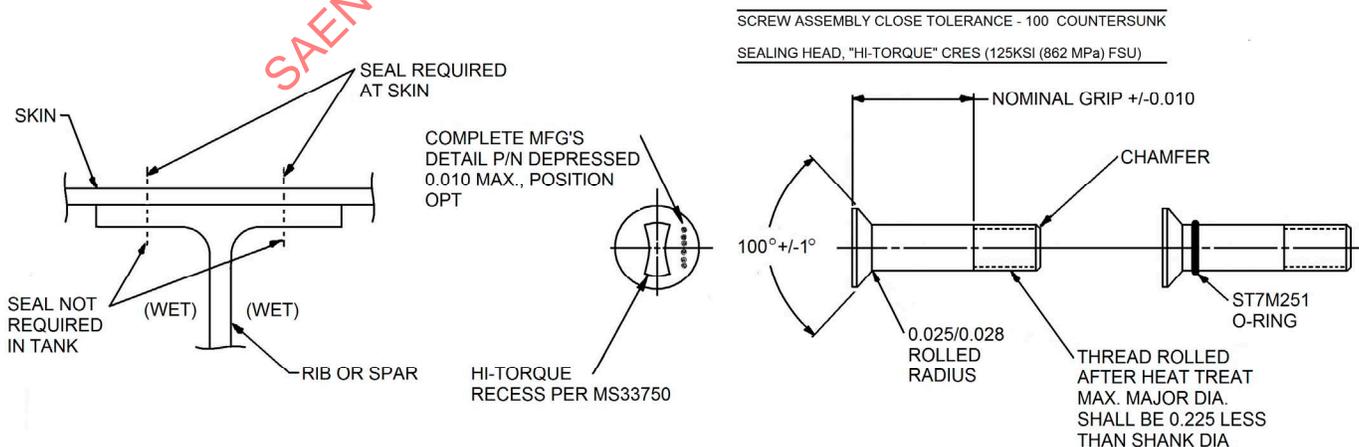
RIB/SKIN ASSEMBLY WITH SELF SEALING FASTENER
